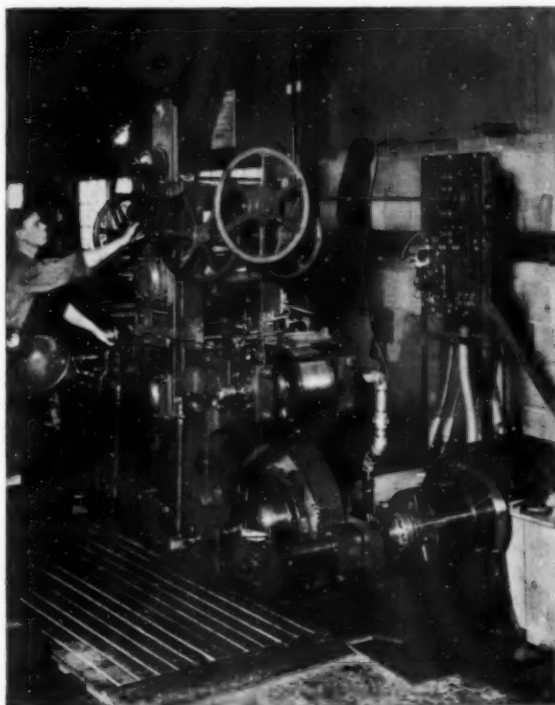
View of a small Steckel mill (The Cold Metal Process Co.).
